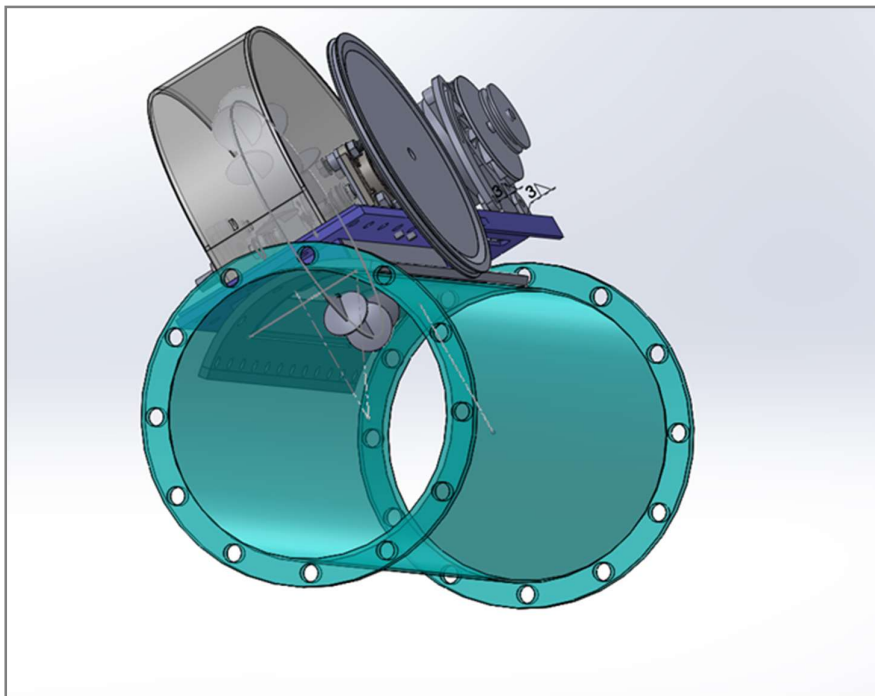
Three-dimensional design illustration of the IPW2 turbine installation – side view
